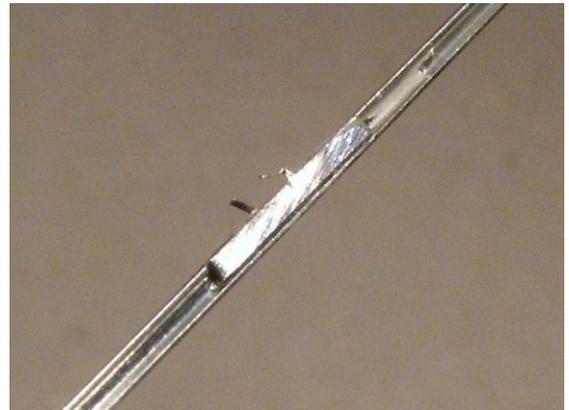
0.25mm Packing for joggling FB Rail - scraps from etch kit surround.
